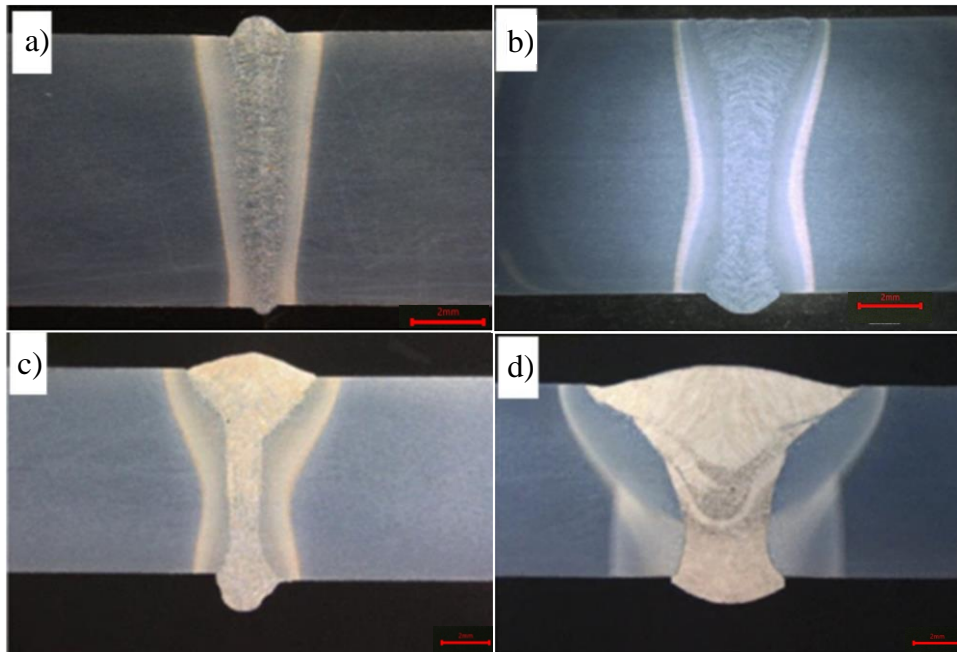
Cross sections of welds in the UHSS with different welding processes, a) Electron beam welding, b) laser welding, c) laser-GMAW hybrid and d) GMAW (Mod. Tümer et al., 2022, p. 208).
